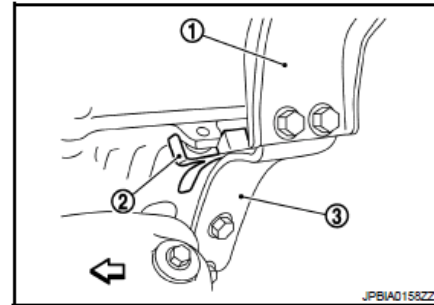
Identifying Engine Rear Lower And Upper Slinger
